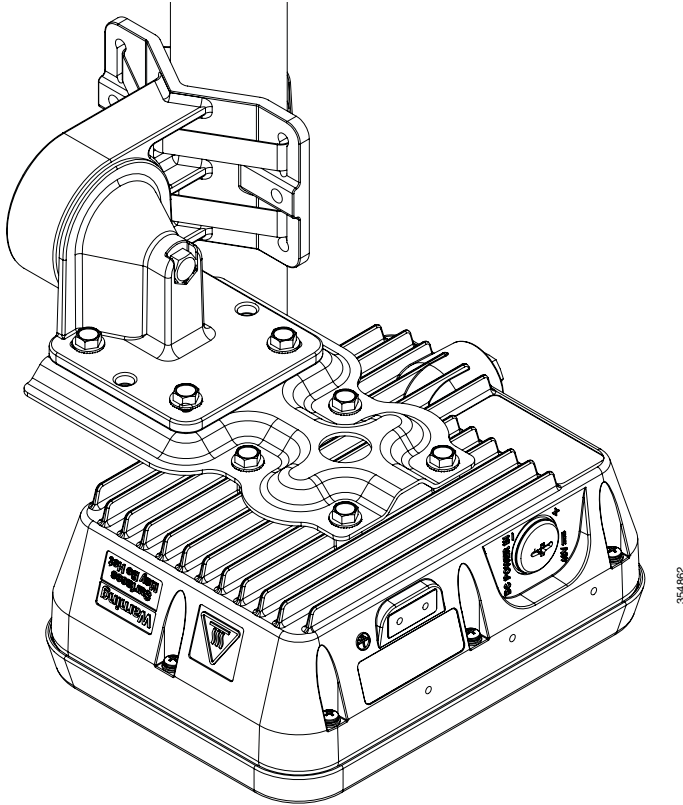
Exploded View of the Pivot Bracket Parts with Horizontal Mount Plate
